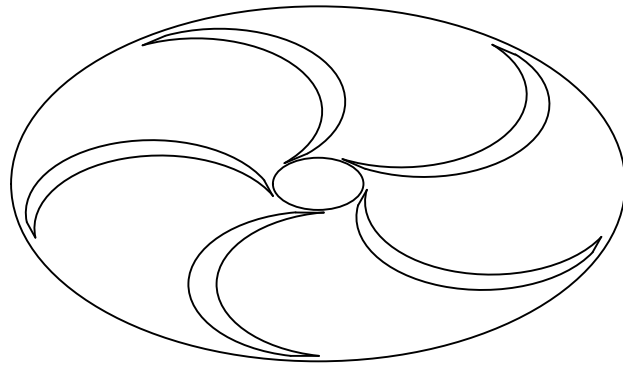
(b): Three Dimensional View of Four Bladed S-shaped Vane Type Rotor
